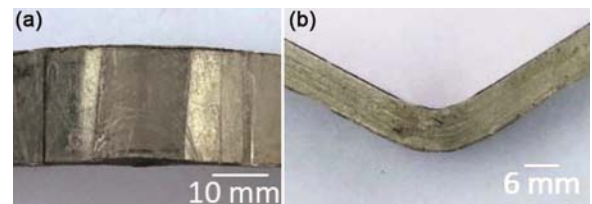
Views of weld 28 after flexural test (a) surface and (b) side.
